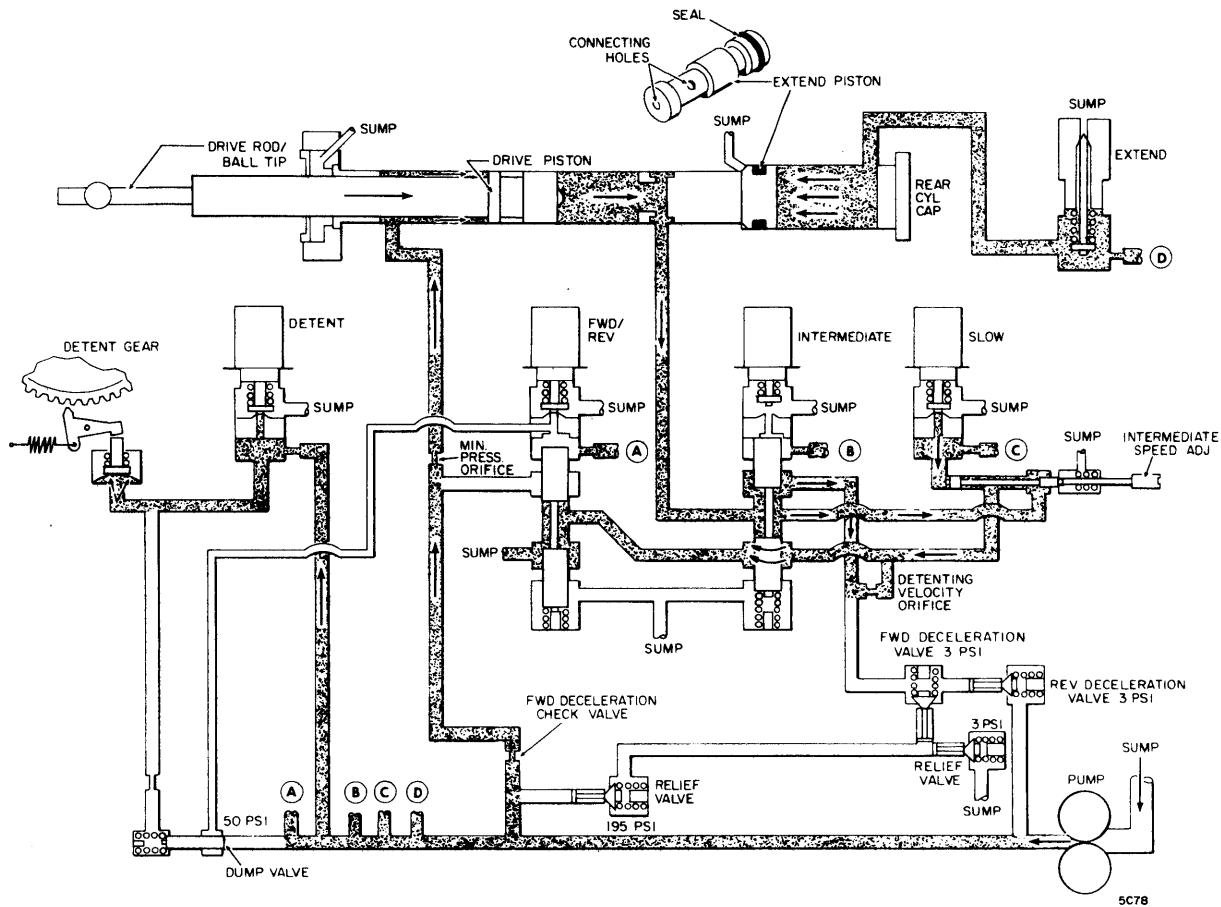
Hydraulic Actuator - Reverse Intermediate
